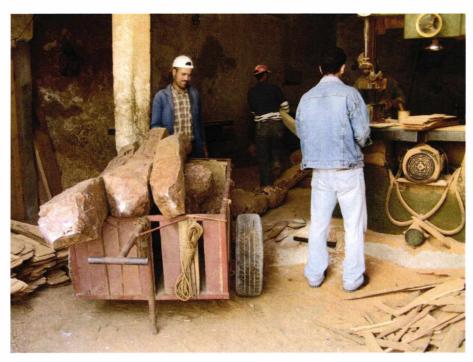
Wood arriving at the sawmill by *caroser*. The beams will join the 'queue' of wood on the floor. The bandsaw can be seen on the right, in front of which is the edge of the scrap wood heap. Beams that have been cut into planks await collection in the left of the photo.
